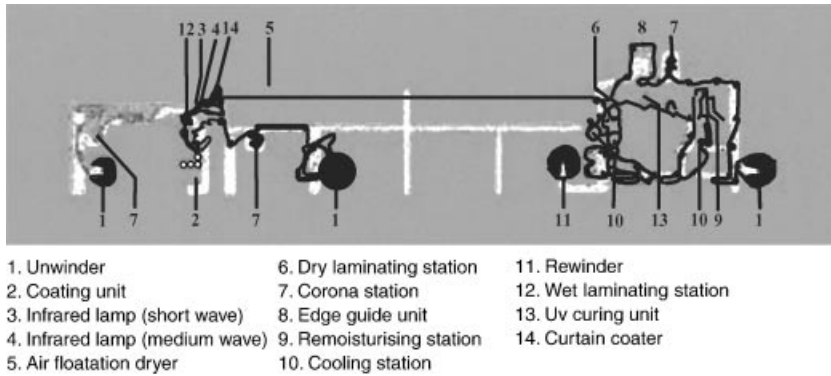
Coating line showing components. Courtesy of Polytype America Corp.
